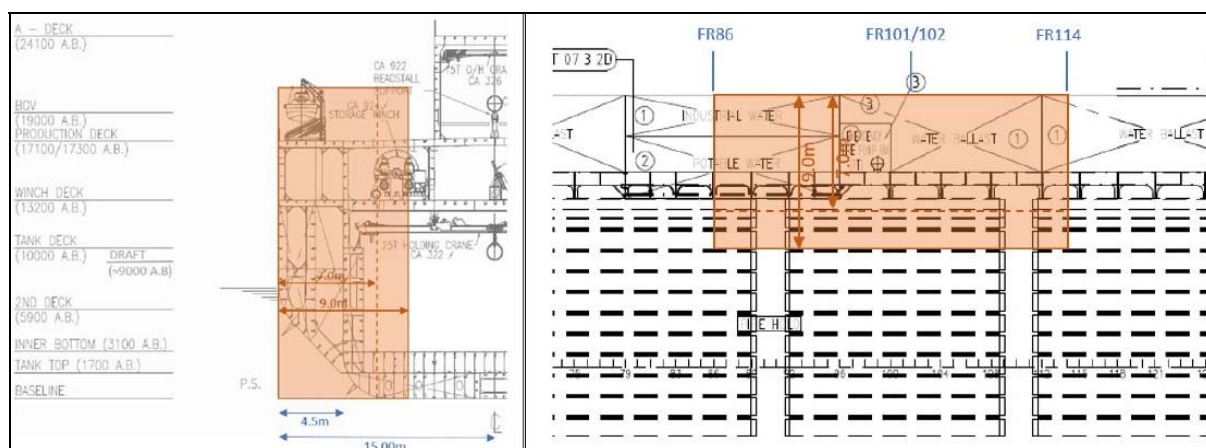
Transverse section (left) and 2nd deck plan view (right) showing estimated damage penetration (height and length)
